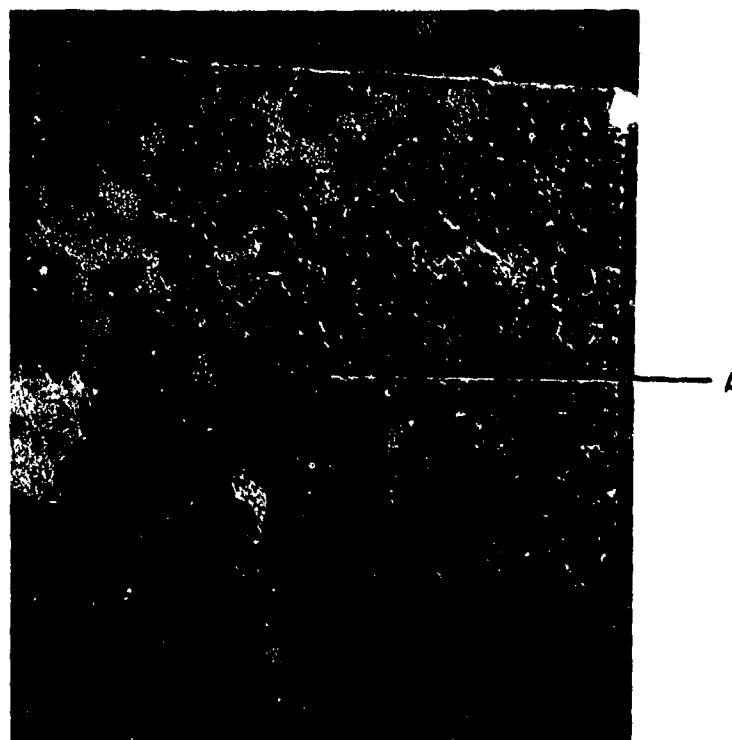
Fracture surface of an A-36 Charpy specimen tested at -83°C , 7x.
